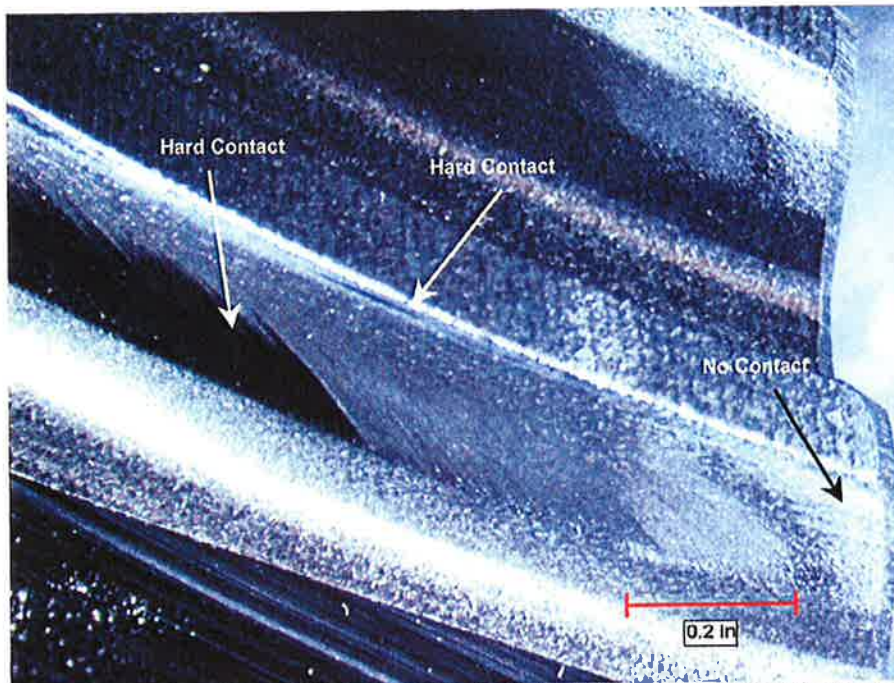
SWRI SAMPLE ENLARGED IMAGE OF FIGURE 3 GEAR TOOTH SURFACE ON DRIVE SIDE AT TOE END. NOTE UNEVEN REGION OF CONTACT BETWEEN UPPER AND LOWER FLANK, AND TOE END VERSUS TOOTH MID-SECTION. AREA OF HARD CONTACT IS VISIBLE AT UPPER FLANK EDGE ADJACENT TO TOP LAND.
